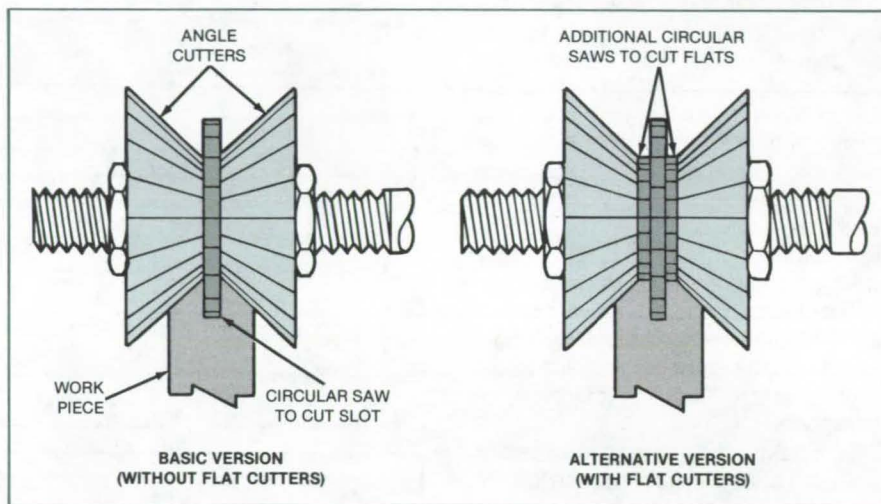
The Cutting Tool is assembled from standard angle cutters and a circular saw or saws. The angle cutters cut the bevels while the slot saw cuts the slot between them. In the alternative version, custom-ground edges or additional circular saws also cut the flats simultaneously.
